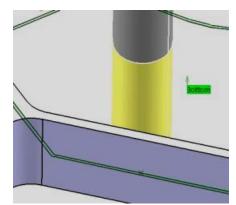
Detail with the tool path for the profile contouring mill, finish surface
